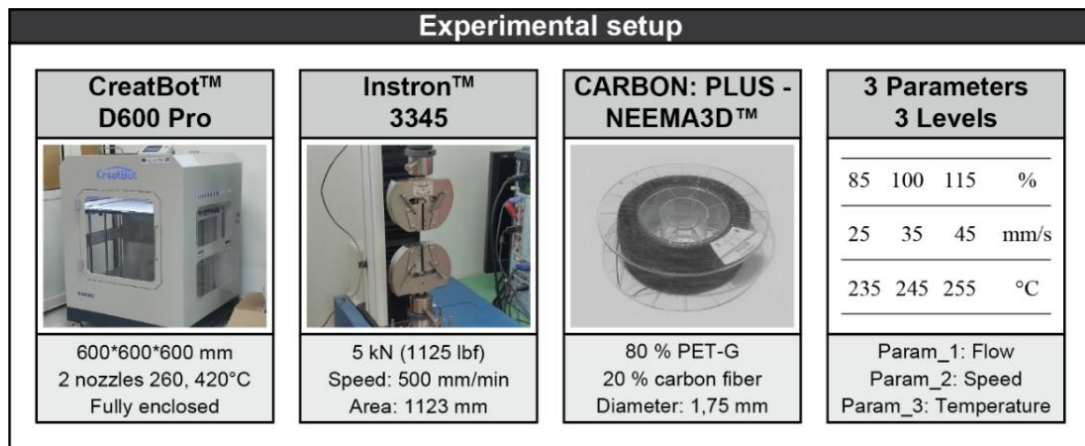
Experimental setup: 3D printer, Tensile machine, Filament and Parameters
